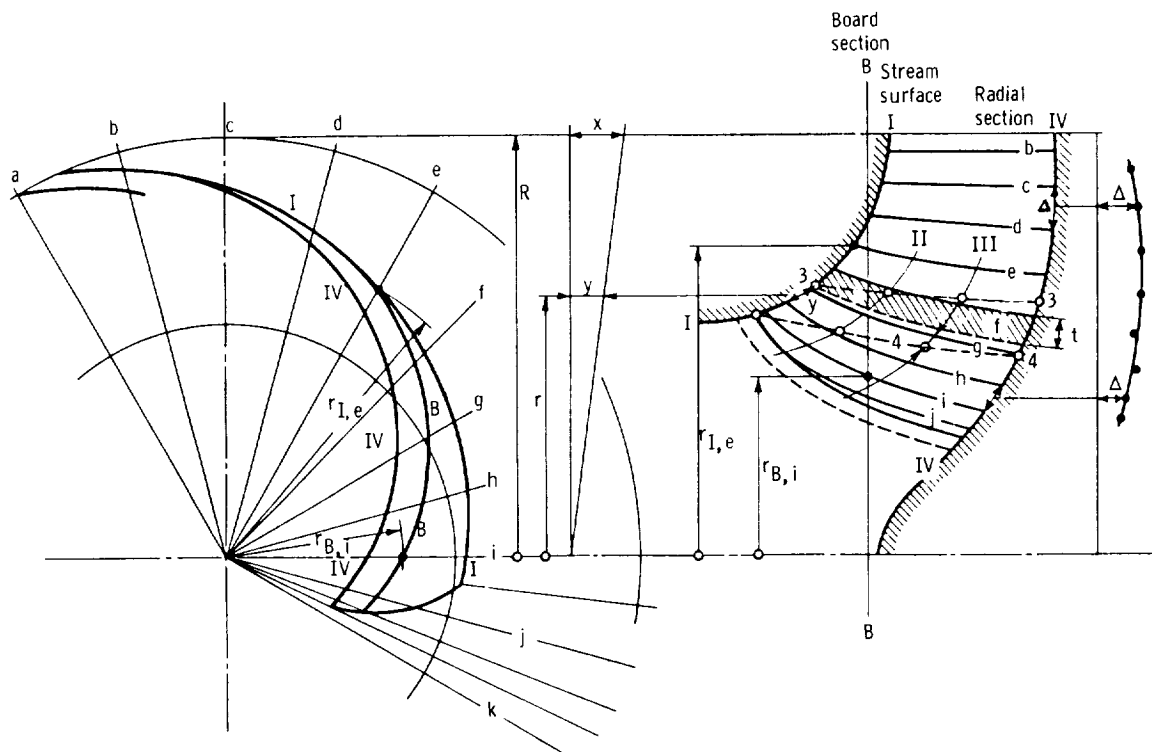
Layout of Francis impeller designed and tested in late thirties showing contour and one board section (left) and radial sections (right).
